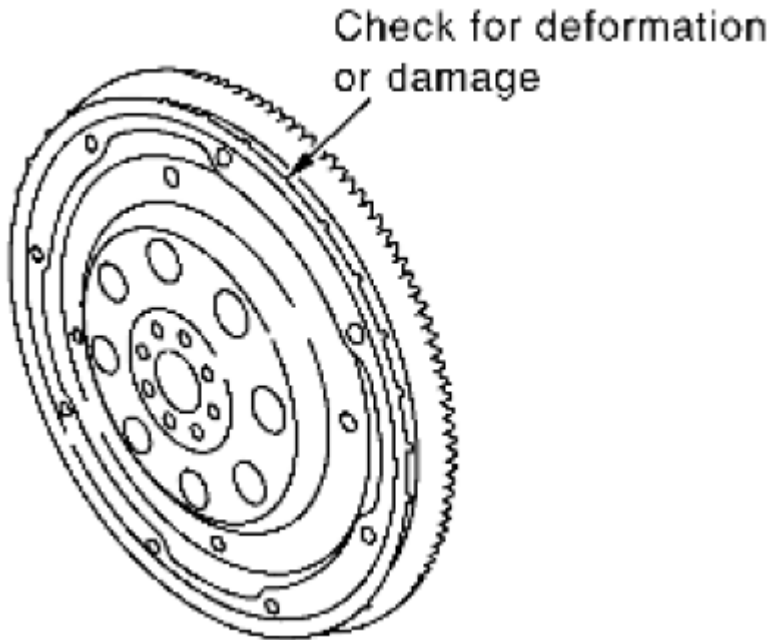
Checking Drive Plate And Signal Plate For Deformation Or Cracks
